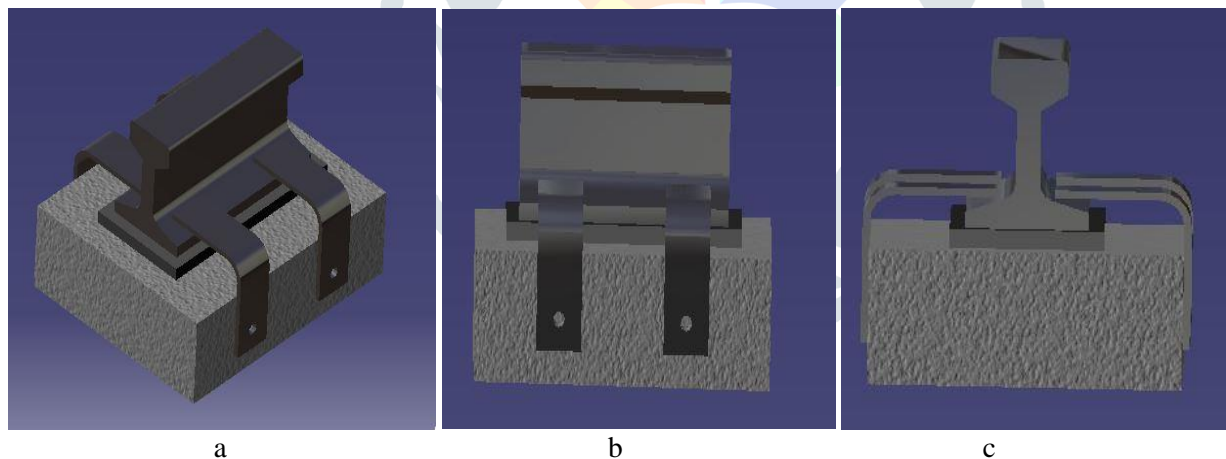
CAT model a) Isometric view b) Front view c) Side view
